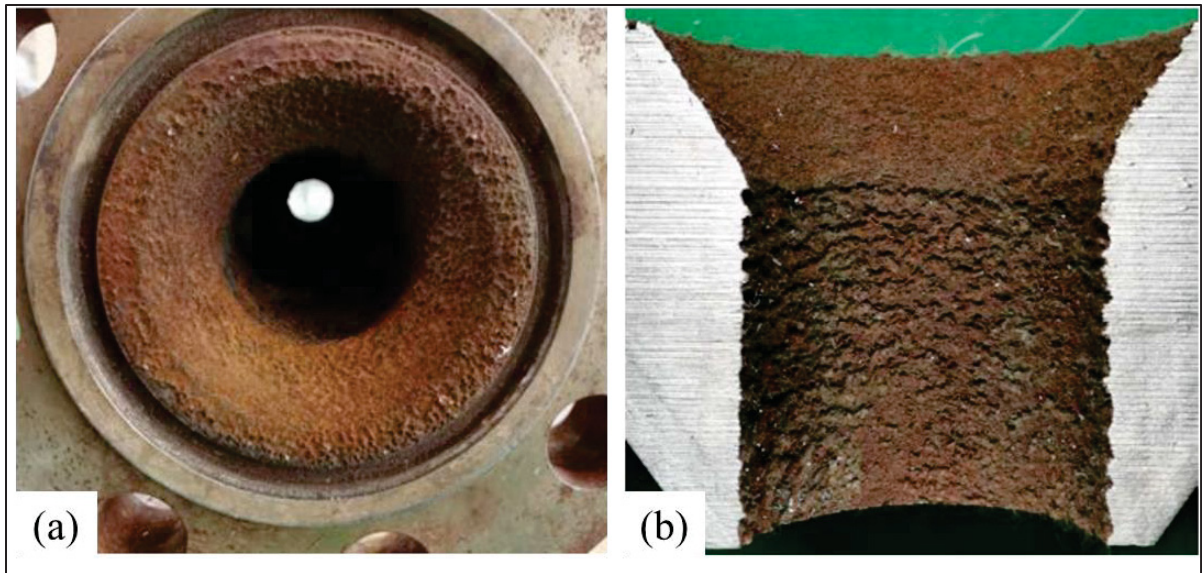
Macroscopic image of the corroded ASTM A105 flange; (a) corroded sealing groove and inner wall; (b) cross section of the corroded flange
